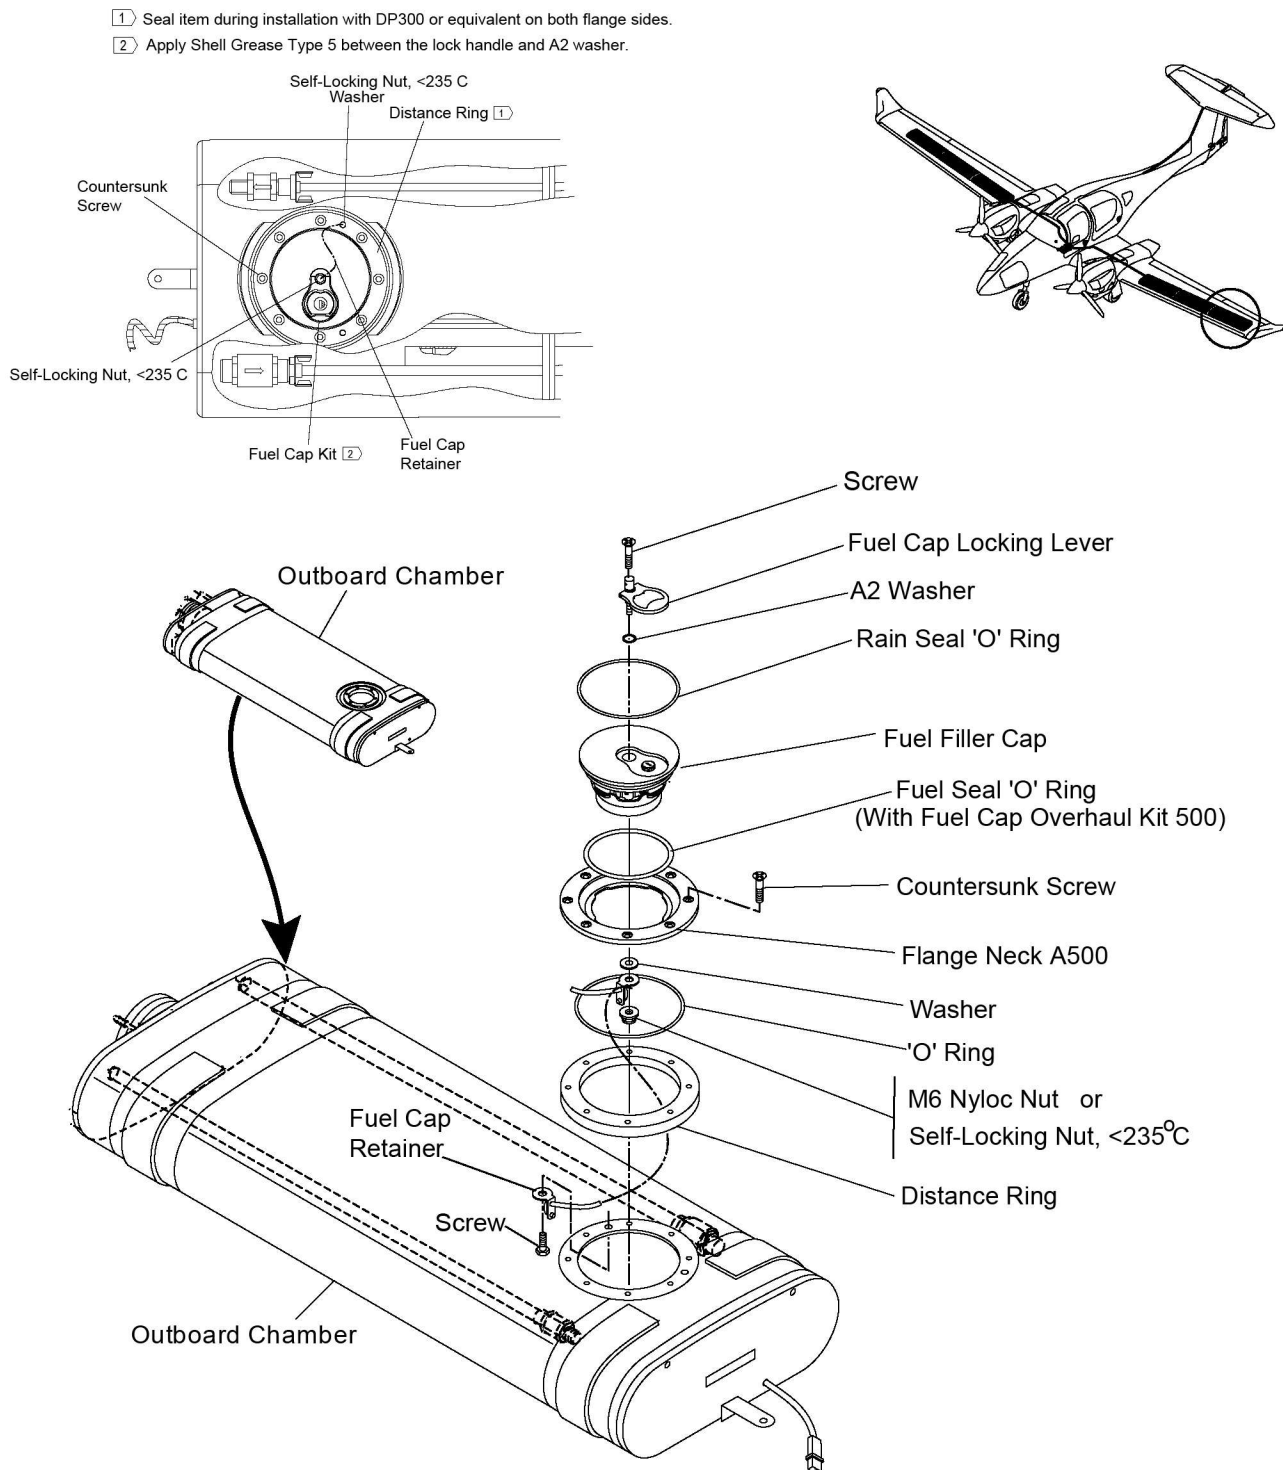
Fuel Filler Cap - Disassembly/Assembly
